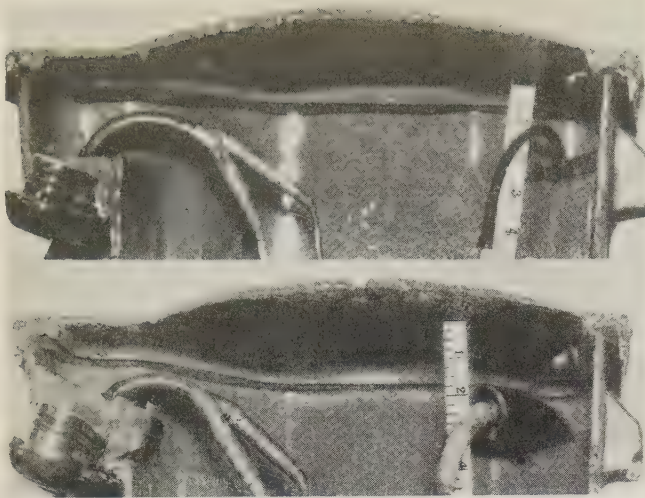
Old style primary bushing (above) and improved gooseneck bushing (below) on a 5-kva single-phase transformer
